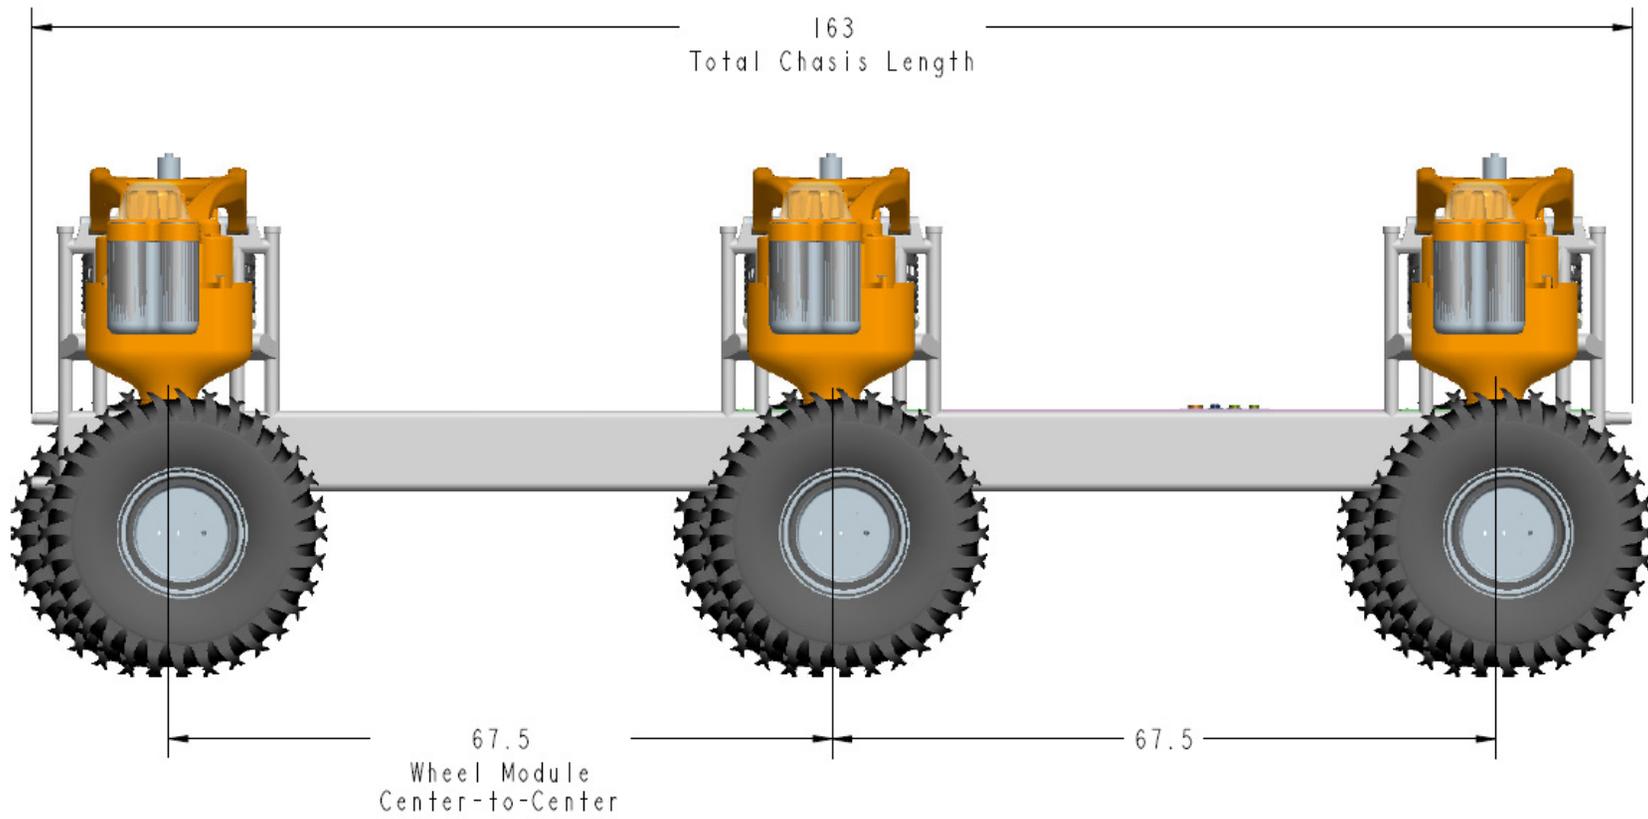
Total chassis length and center-to-center wheel distance used for SEV mock-up fabrication.
